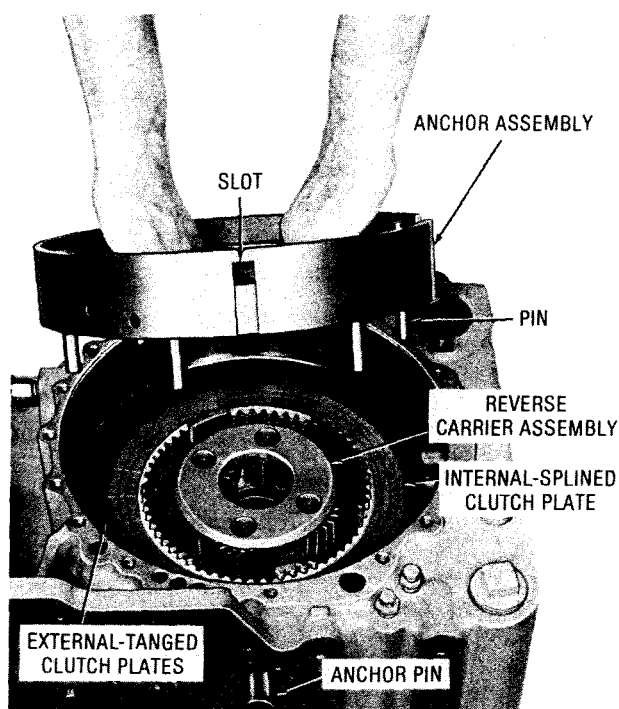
Installing forward-and-reverse clutch anchor assembly (TRT-3)
